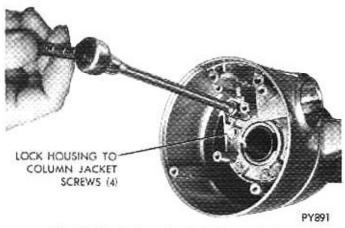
Lock Housing to Column Jacket, Retaining Screws
